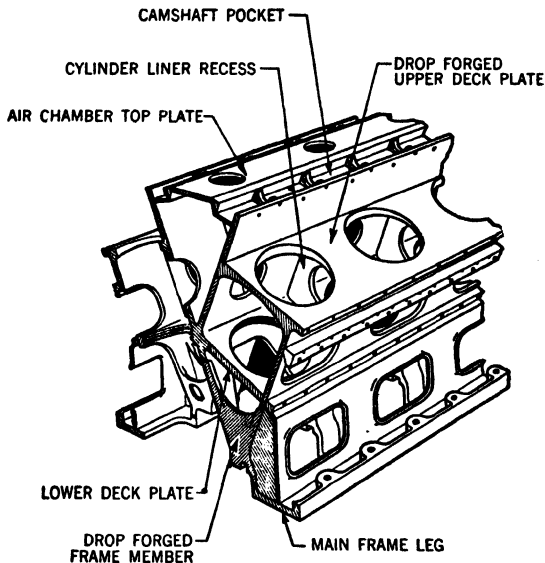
Section of welded engine frame. Many high-speed engines now have frames of welded steel plates located where the loads are put on the engine. This is a Winton engine frame. Many marine engines are designed with welded construction.
